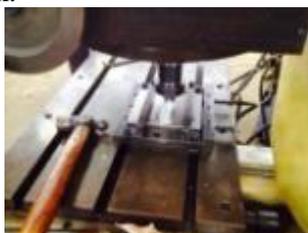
Showing clamping of plates during FSW of aluminium alloy
